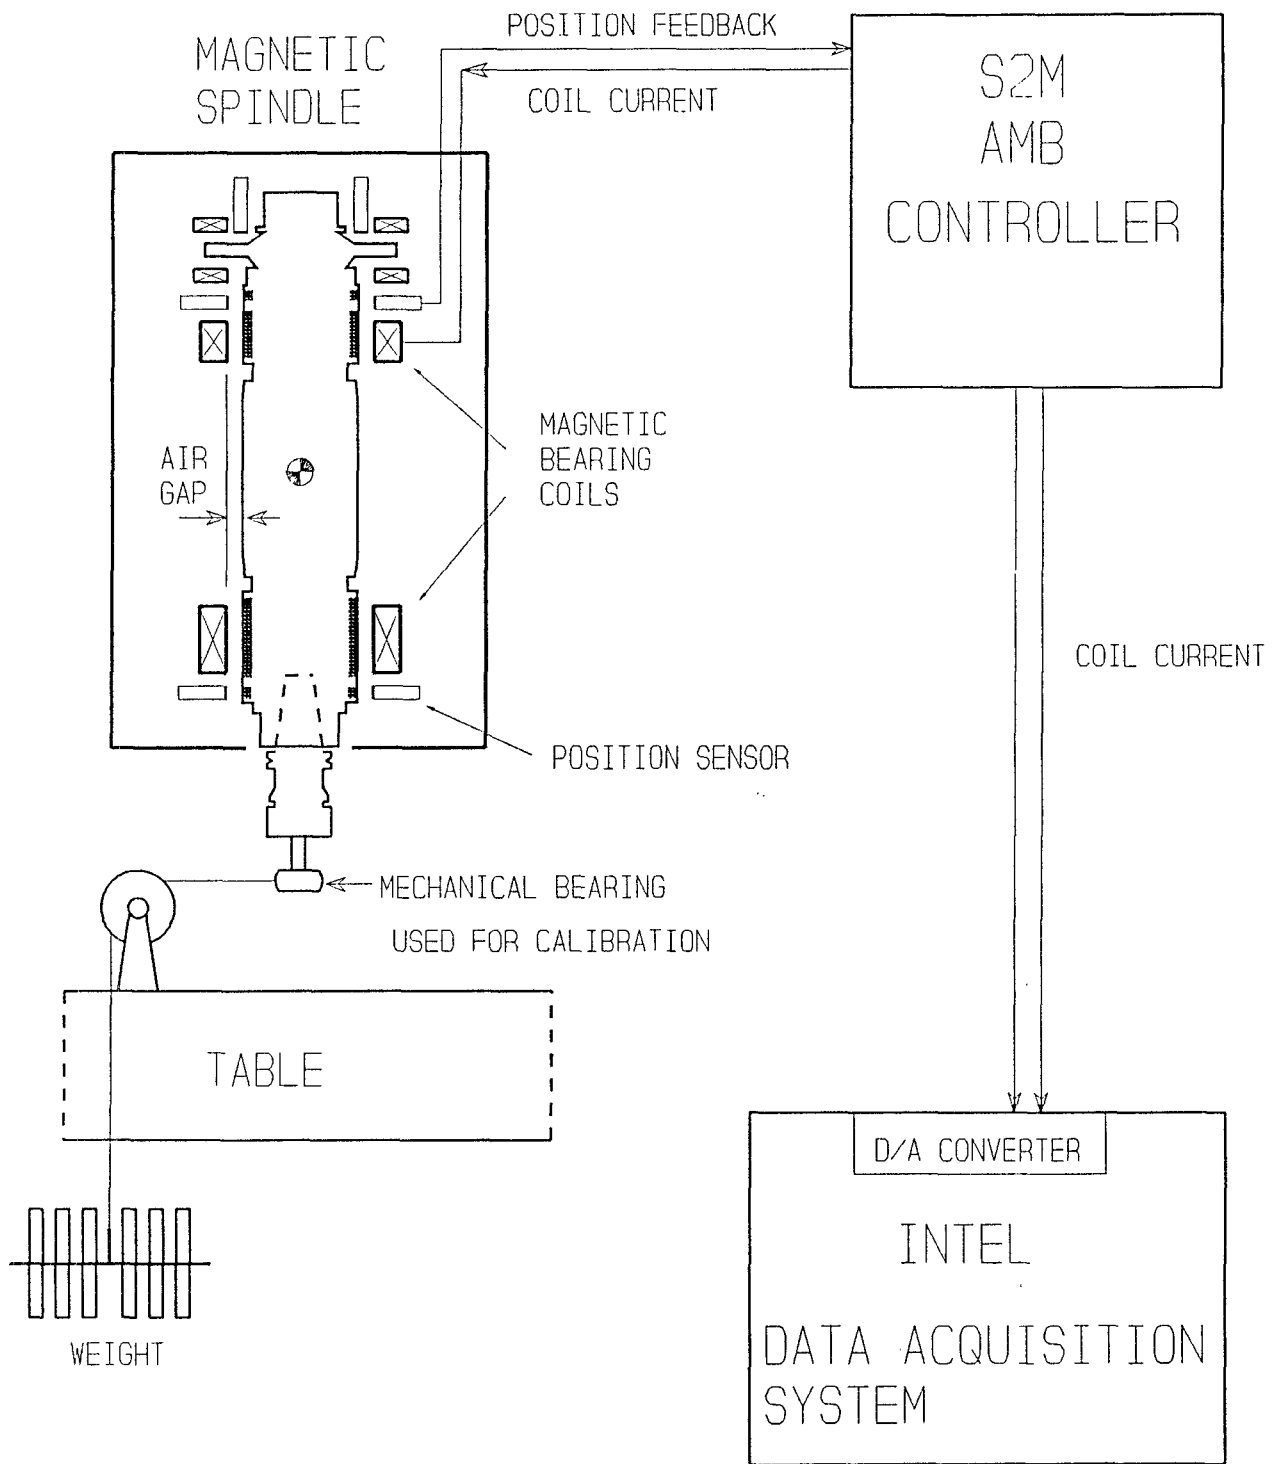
Matsuura 500 Machining Center with the S2M Magnetic Bearing Spindle and the Experimental Setup for Static Loading Calibration
